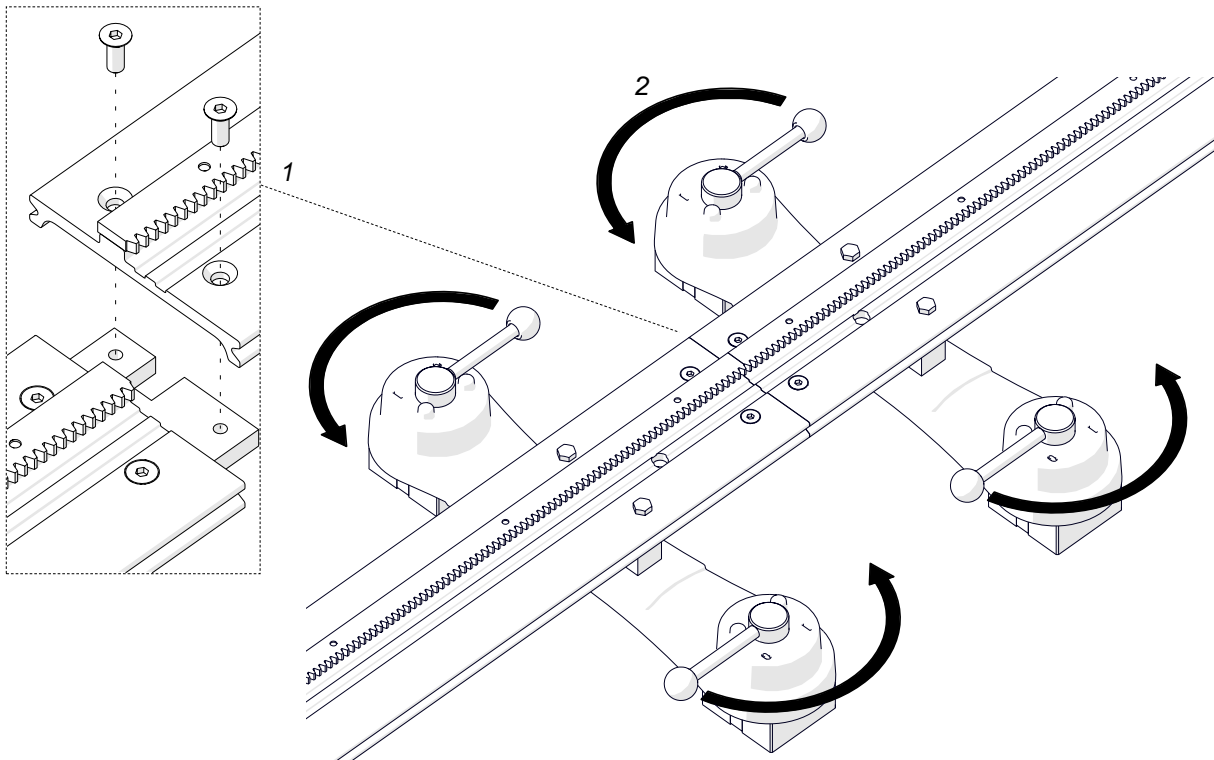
Connecting the rails and clamping the magnetic units to the surface
